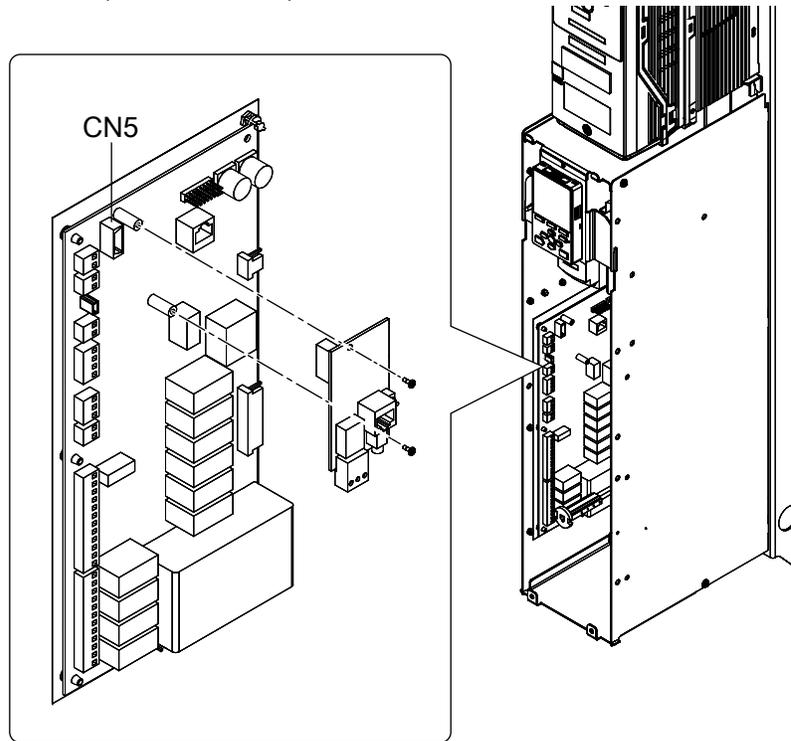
Insert Option into Bypass PCB CN5 Connector Port
